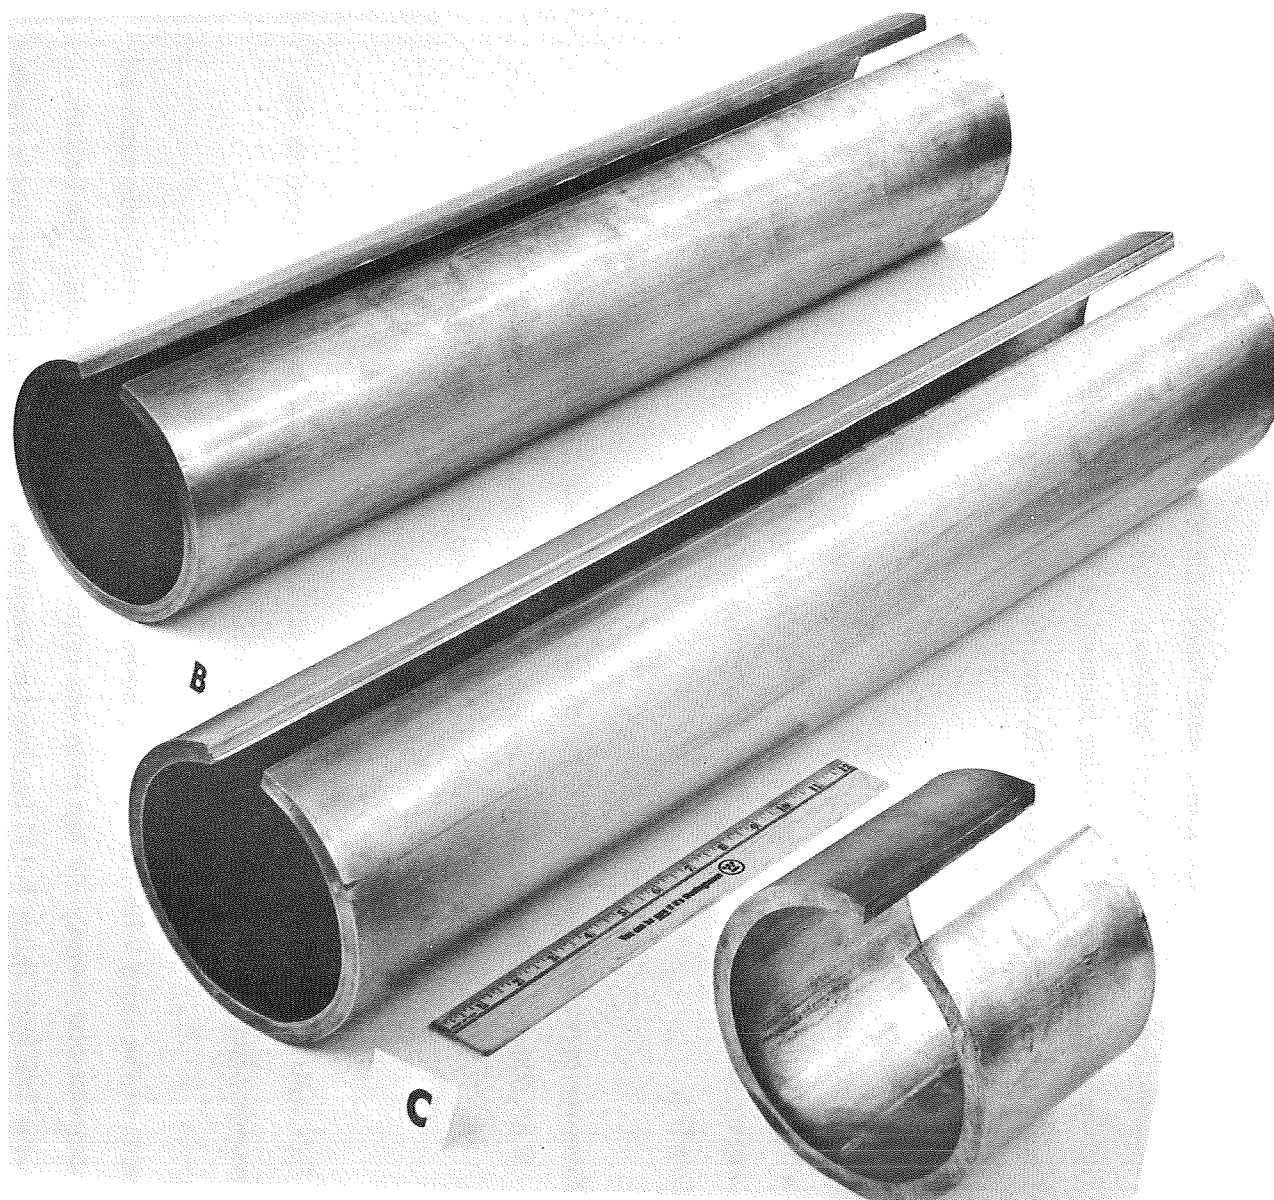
Press Formed T-111 Tube Shells P, B, and C
